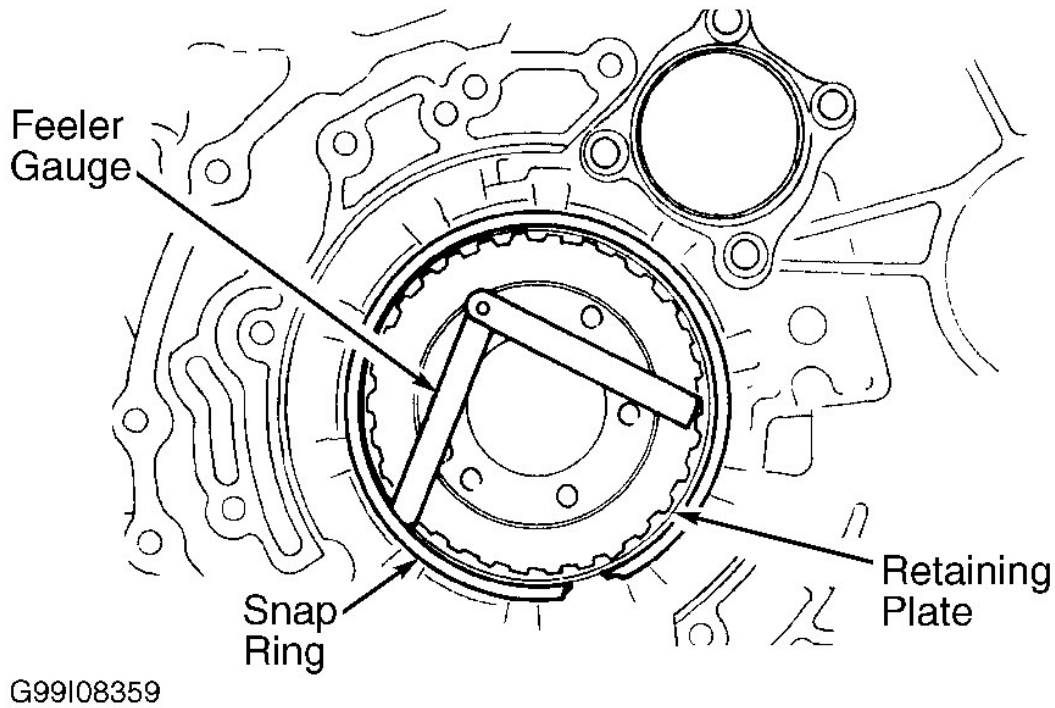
Measuring Low-Reverse Brake Clutch Clearance
